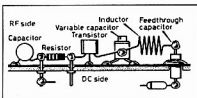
Pin-and-wire RF construction, again using single-sided board, copper side uppermost. (Courtesy RadCom).
